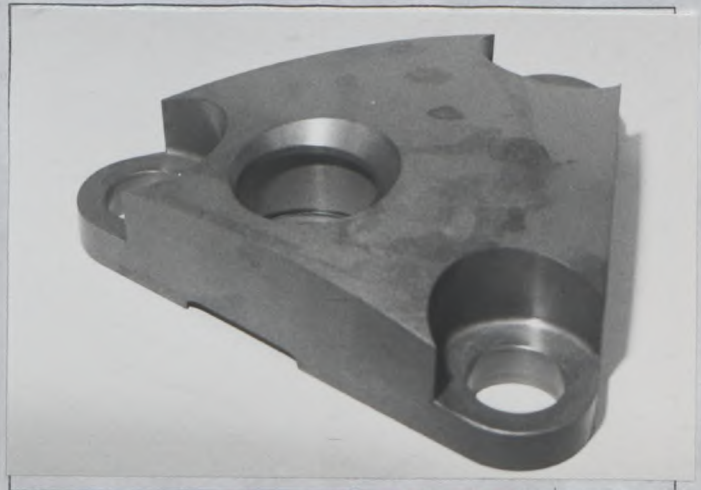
REINFORCED TOPMOUNT TYPE A
